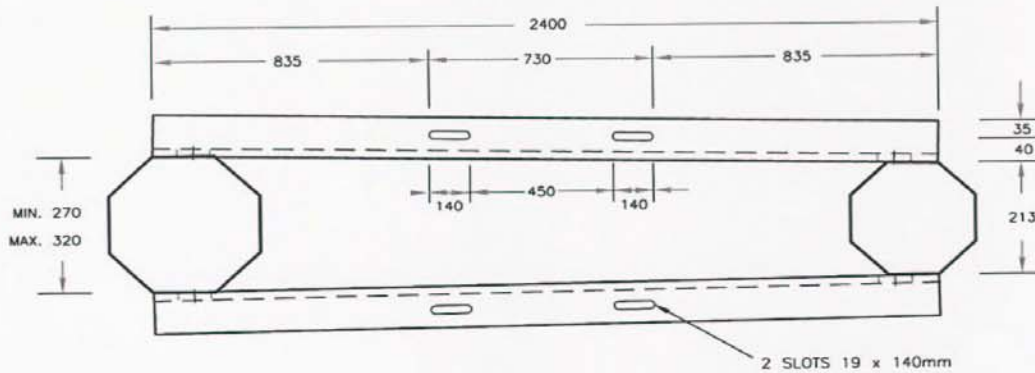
MOUNTING BASE FOR 200kVA AND 300kVA POLE MOUNTED TRANSFORMER
